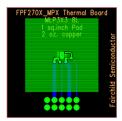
80°C/W Mounted on a 1in² Pad of 2-oz. Copper
